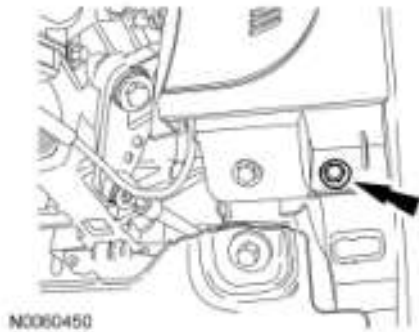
Inspecting Thermal Bypass Valve For Damage
